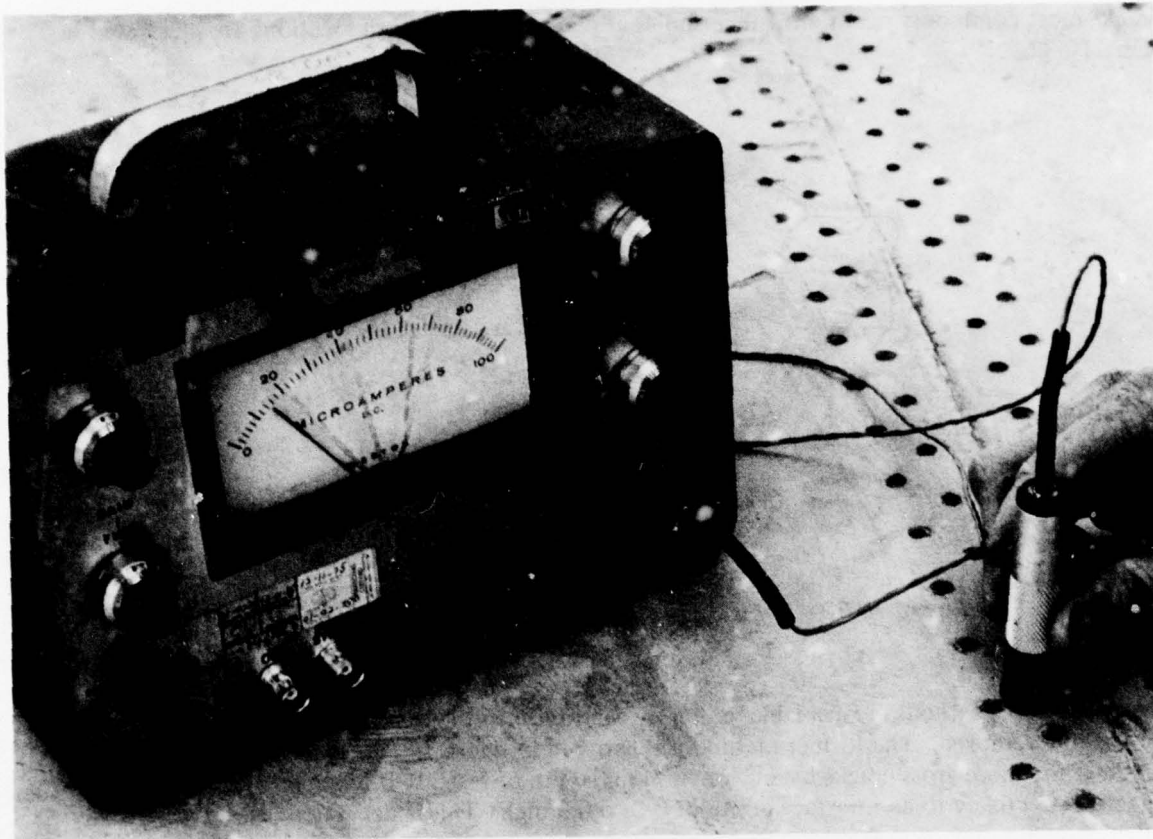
Exterior Surface Eddy Current Inspection for Cracks in Fastener Holes
